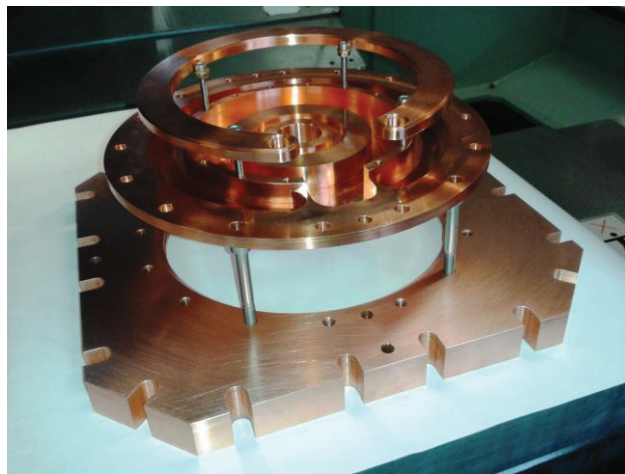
Exploded assembly showing the RFQ end flange components prior to vacuum brazing.
